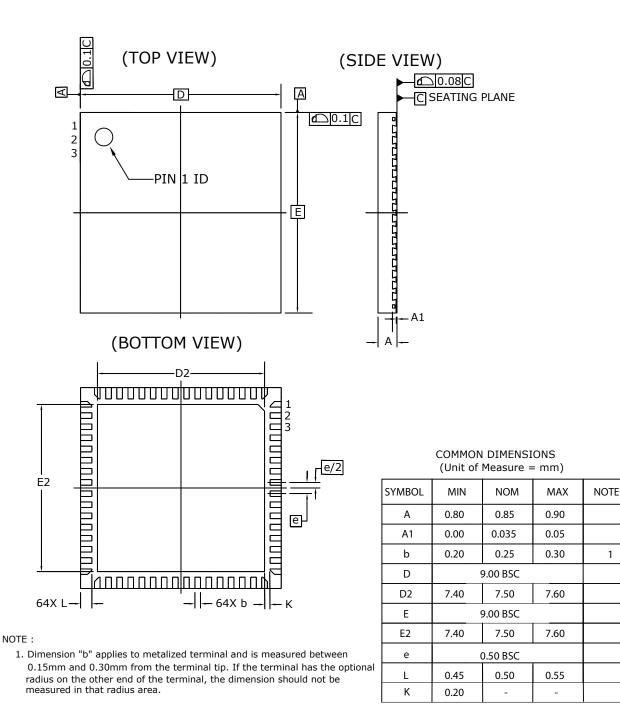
Package Dimensions: 64-pin, 9mm x 9mm x 0.85mm TQFN (0.5mm pin pitch) with Exposed Pad.
